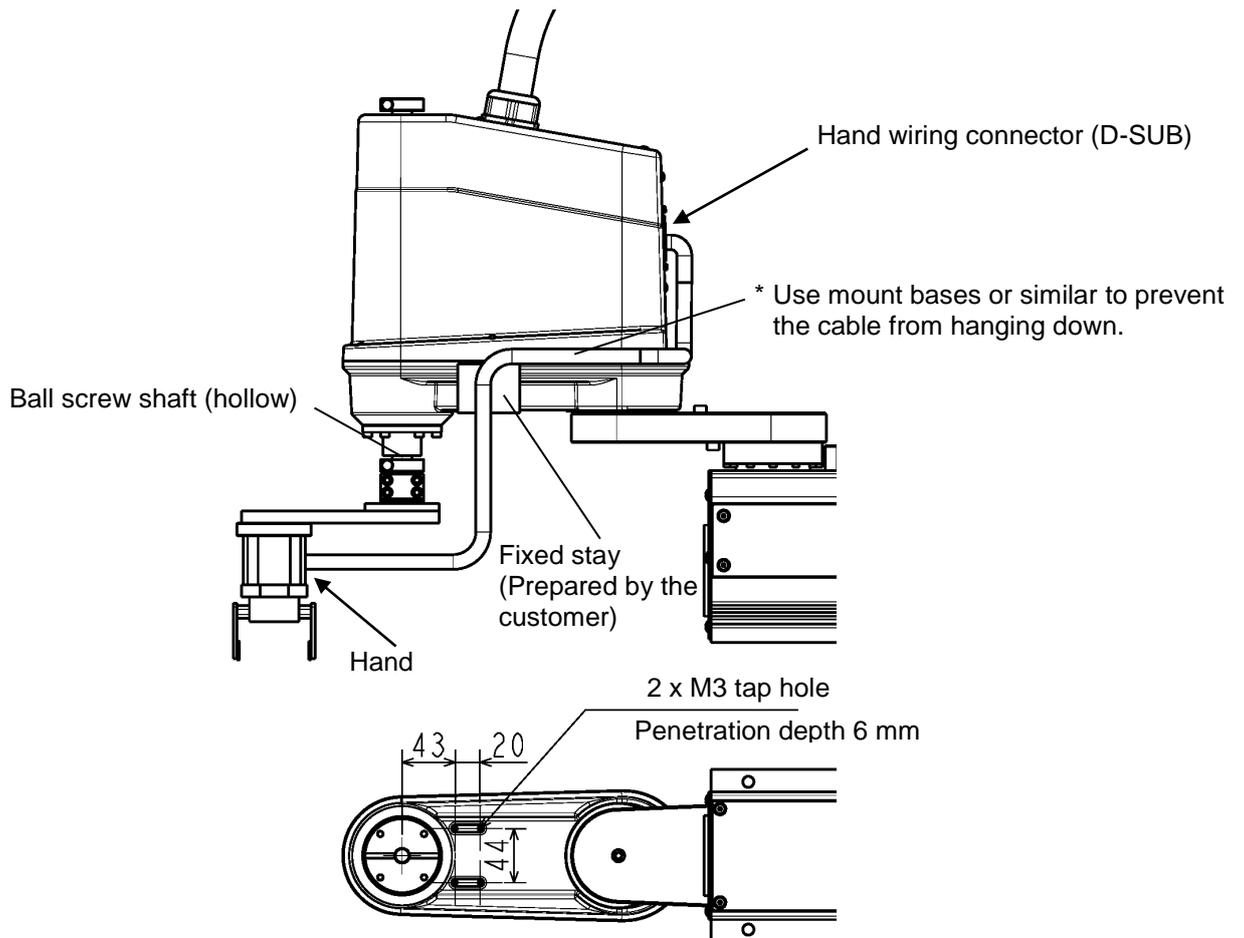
Tool cable wiring installation example using the connector (D-SUB) (KHL-300 and KHL-400)
